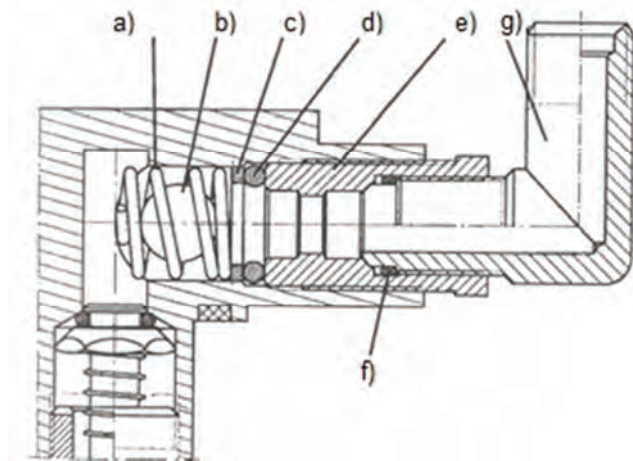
Multivalve check valve [2]: a) spring, b) ball, c) washer, d) rubber sealing ring, e) reduction sleeve, f) rubber sealing ring, g) elbow fitting
